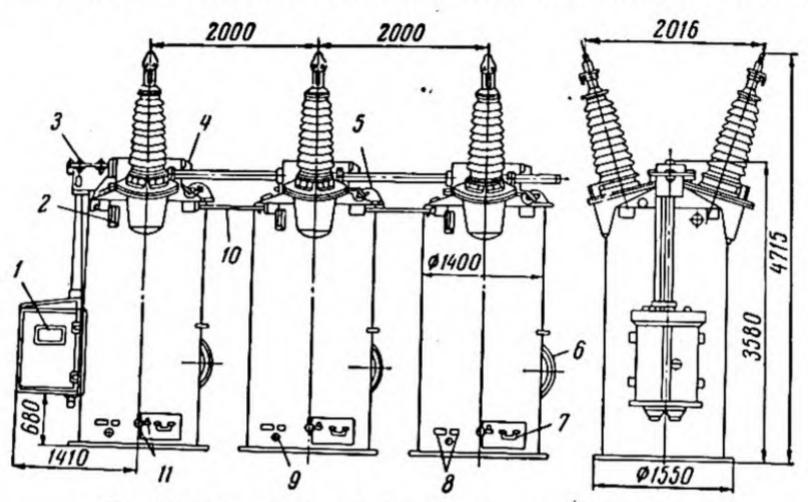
General view of the ΜΚΠ-110 oil circuit breaker:
